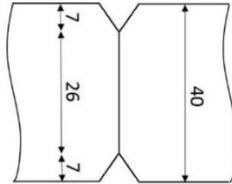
Weld preparation LB-SAW Hybrid, plate thickness: 40 mm
